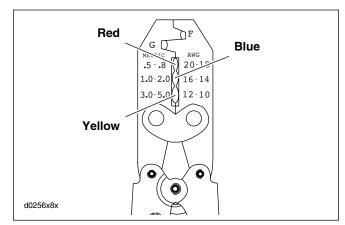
Packard Crimp Tool (Part No. HD-38125-8)
